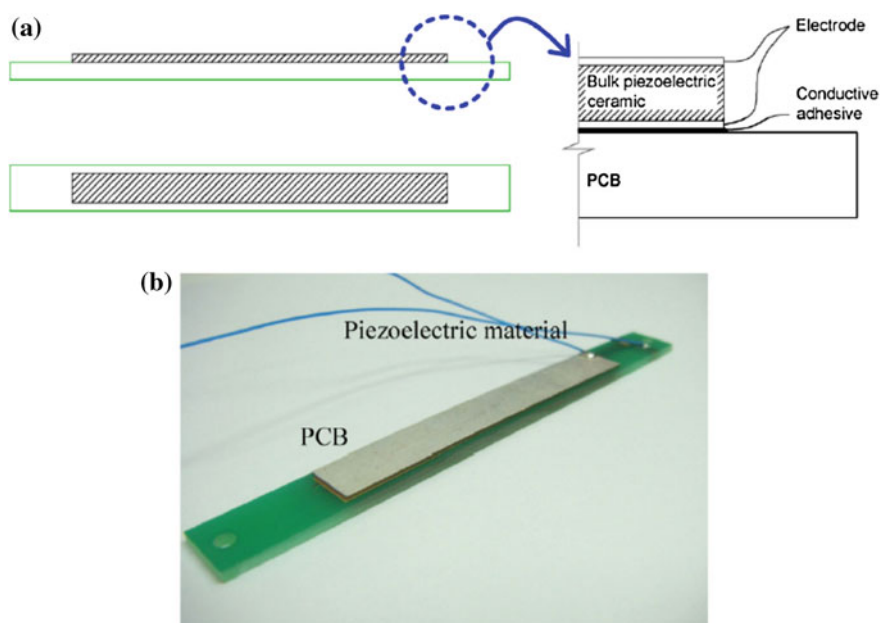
PCB bonded piezoelectric material. a Detail of PCB bonded piezoelectric material. b Photograph of an actual PCB bonded PE material. Reproduced with permission from [100]. Copyright @ 2011, Elsevier
